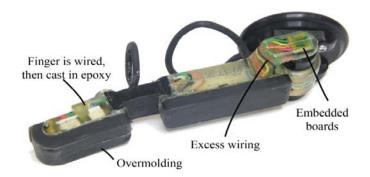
The fingers of the iHY Hand contain several sensor boards, but the wiring is completed by hand before the epoxy is cast.
